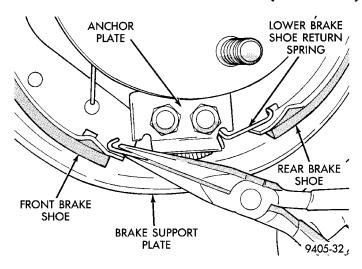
Brake Shoe To Anchor Plate Return Spring
